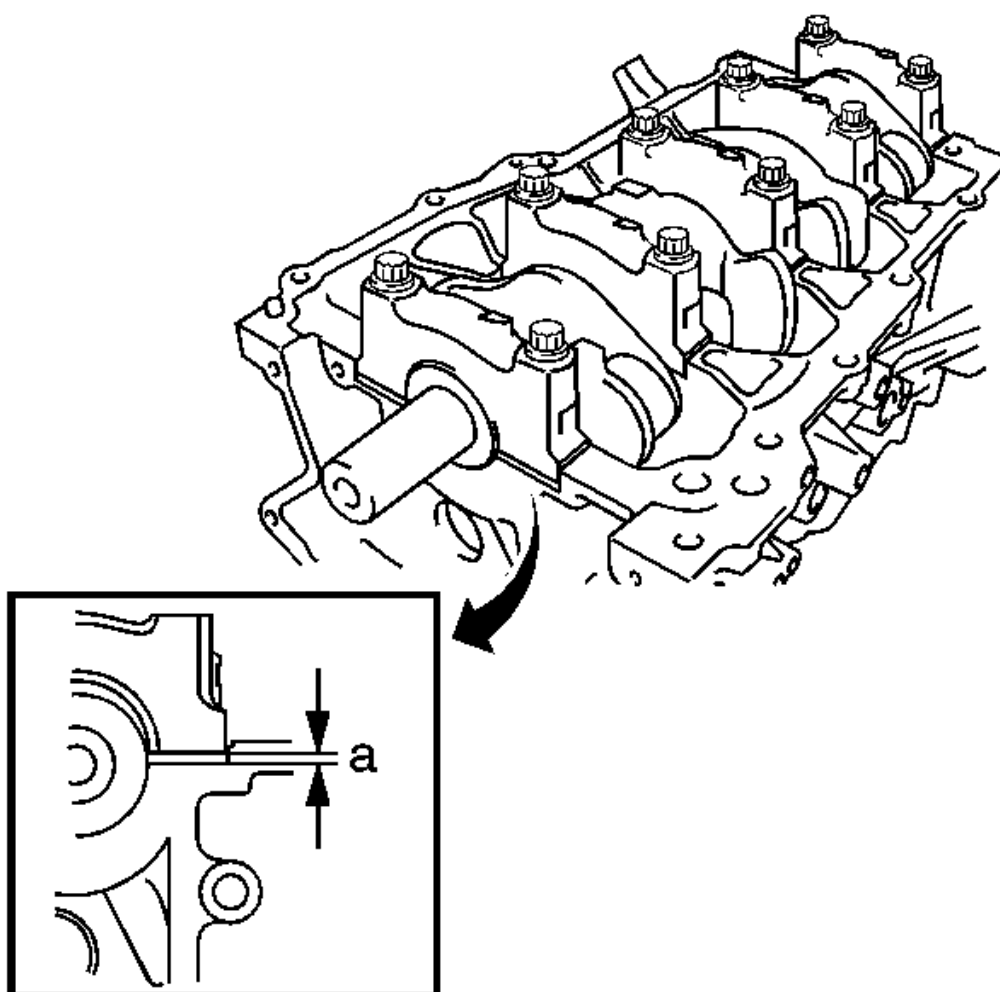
Loosely Installing Main Bearing Cap By Hand
